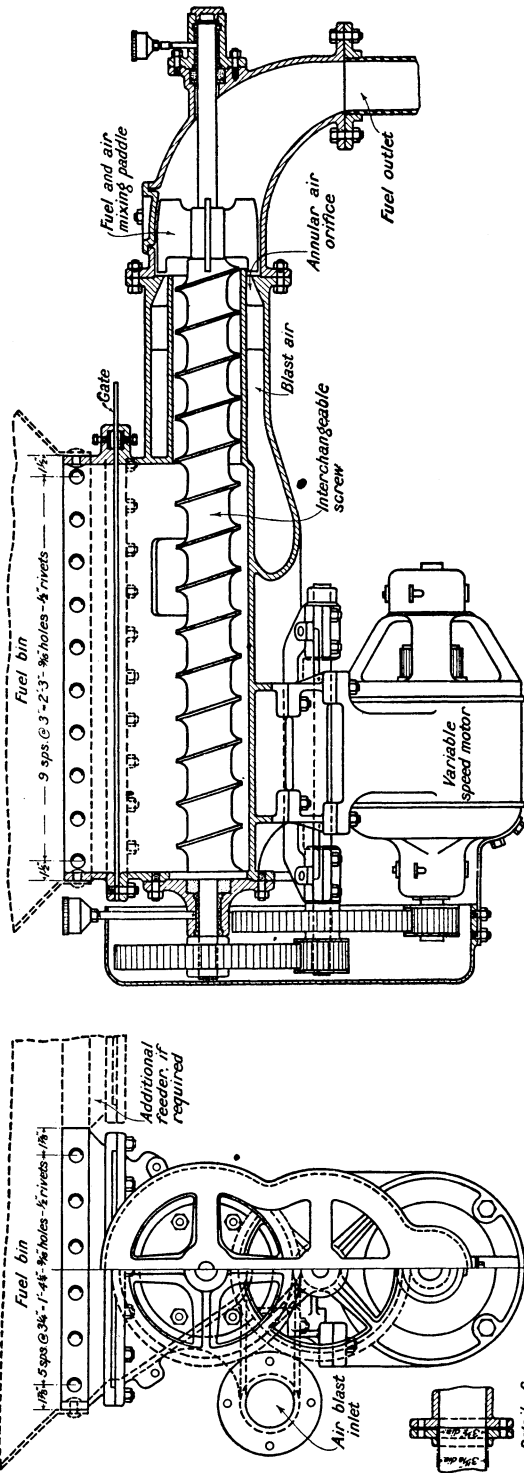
Assembly of type G feeder, Pulverized Fuel Equipment Co.
